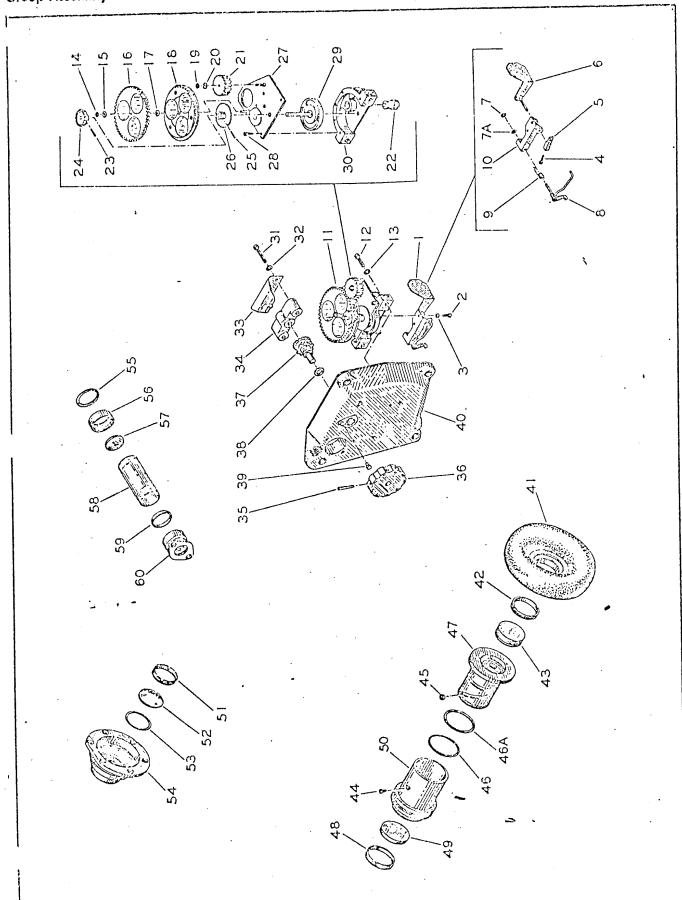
Left Cover, Eyepiece, Field Lens and Desiccator Assemblies
